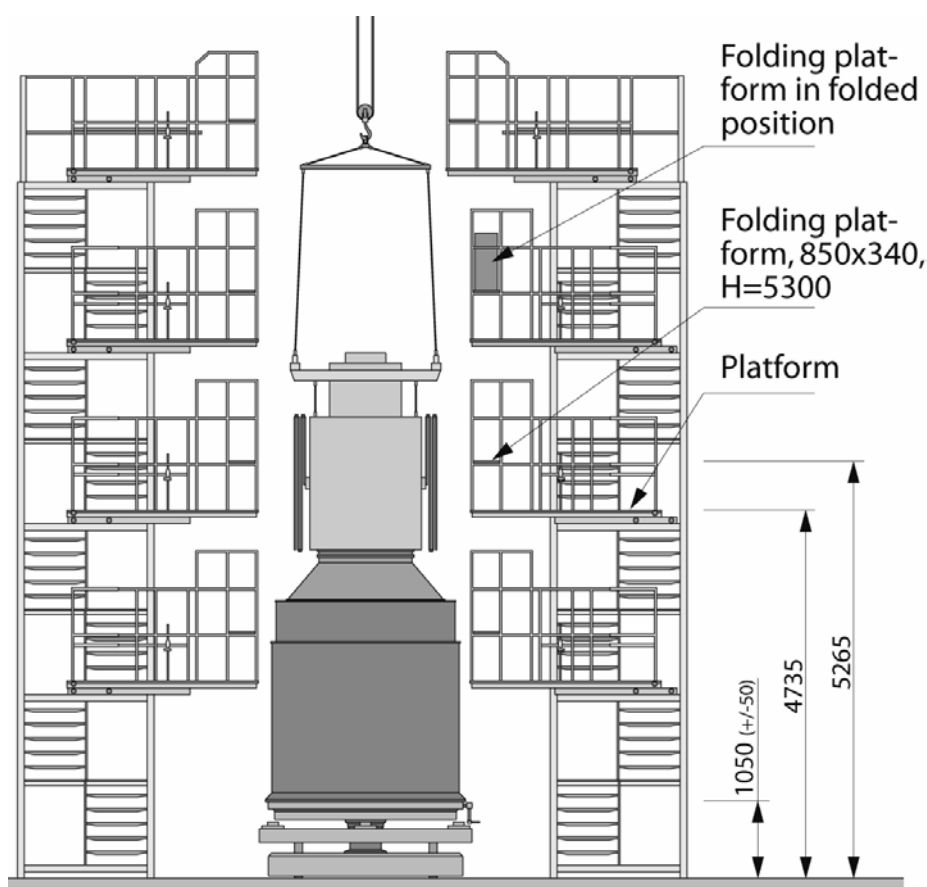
Assembly Stand with Folding Platforms in Upper Composite Integration Room
